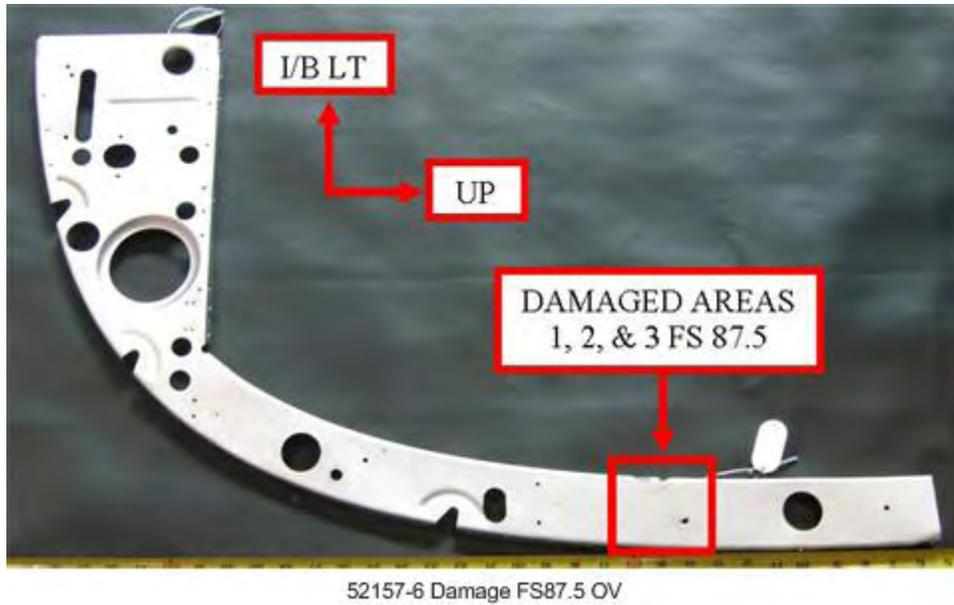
Location of Three Areas of Damage on the Fuselage Bulkhead Assembly FS 87.5
